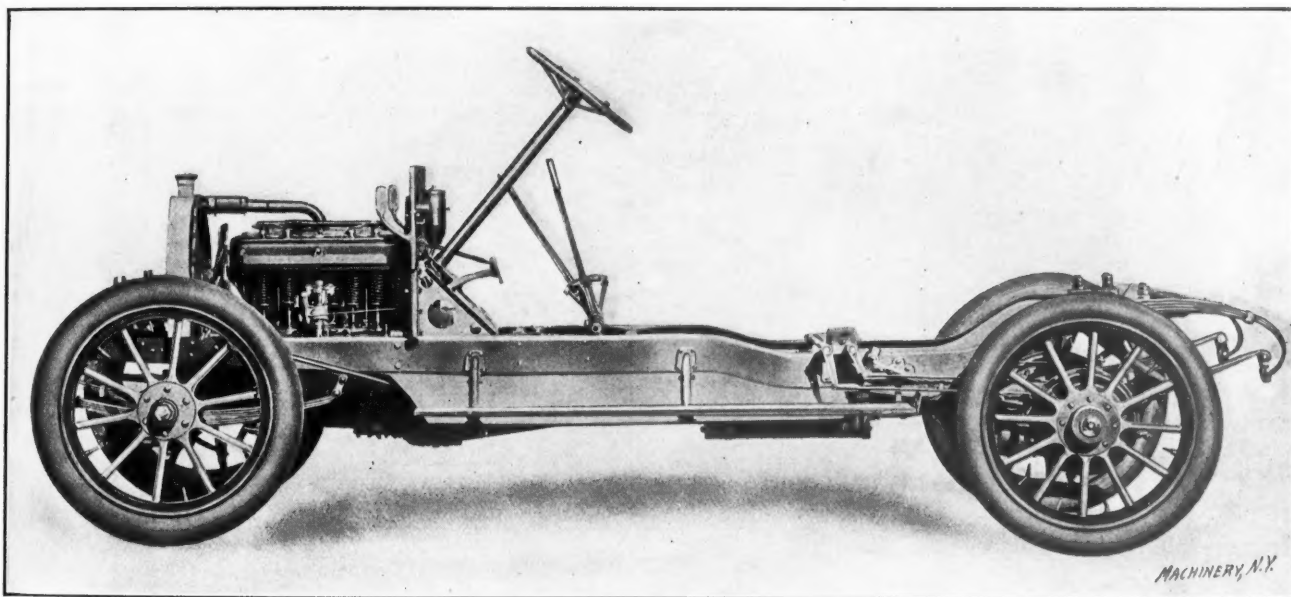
Chassis of an F. B. Stearns Motor Car, showing Three-quarter Elliptic Spring Suspension in Rear and Semi-elliptic Springs in Front
